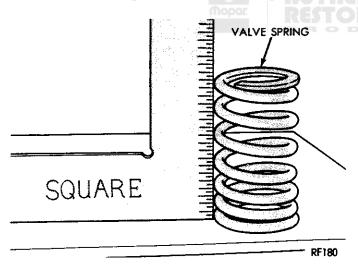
Checking Valve Spring for Squareness INSTALLATION
